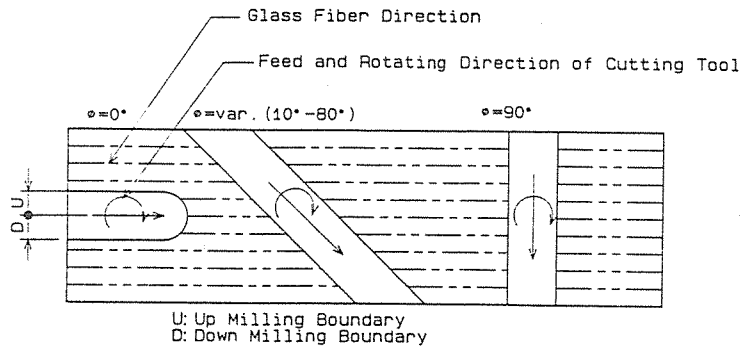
Sketch of the glass fiber direction of the workpiece the feed direction of the tool and the rotating direction of the cutting tool
